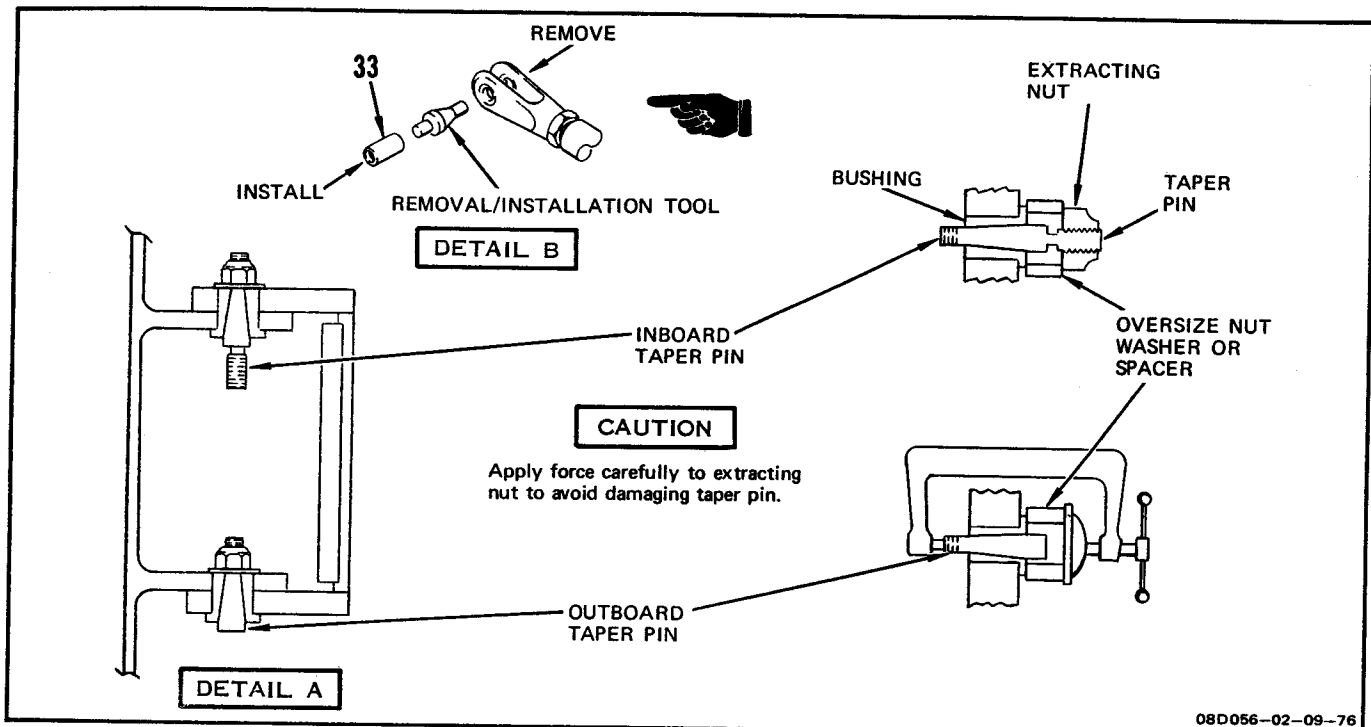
UHT PC Package Removal and Installation (Sheet 2)
